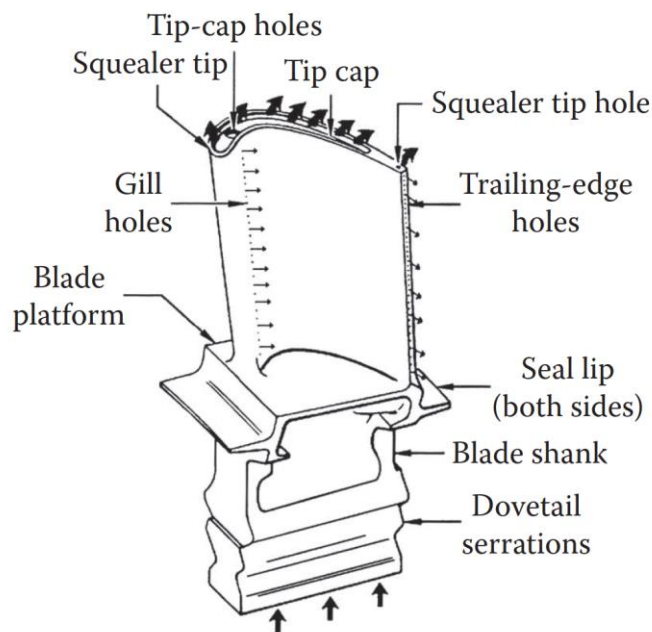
High pressure turbine rotor blade for GE CF6 [60]
